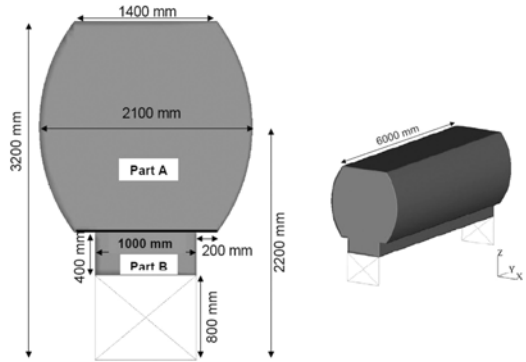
Configuration and dimensions of the standard deformable obstacle
